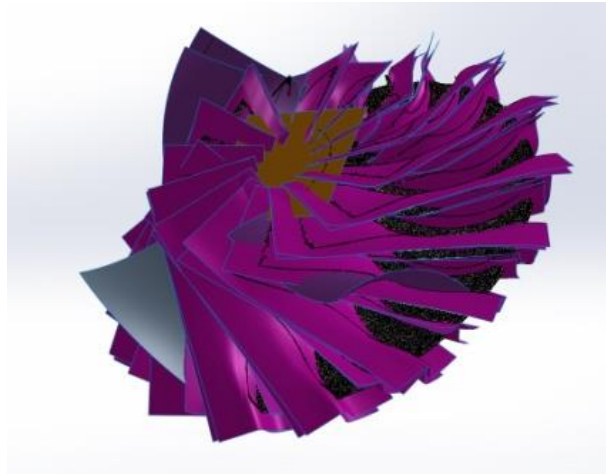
The superimposed surfaces on the model of the exploited compressor motor
